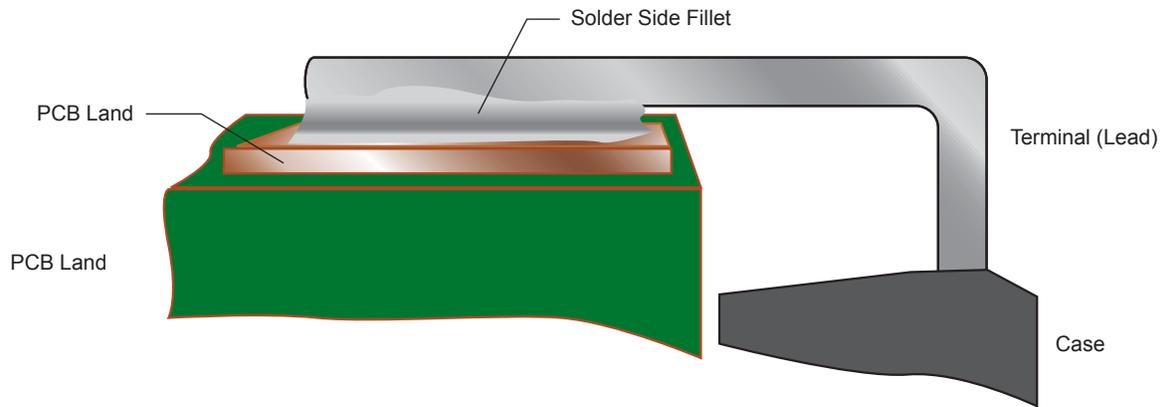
Bent Lead Solder Joint. For straight terminals parallel to the PCB, such as an SIP with leads bent around the edge of a PCB, no lateral overhang of the terminal should be permitted for a high-reliability (IPC class 3) assembly. Solder underneath the lead should be thick, and a wetted fillet should be evident between the lead and the lands (IPC-A-610 §8.2.5.7).
